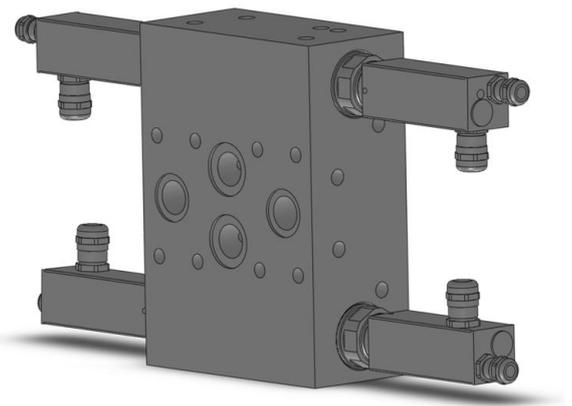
3D model of the valve block including fast switching valves in four metering edges.
